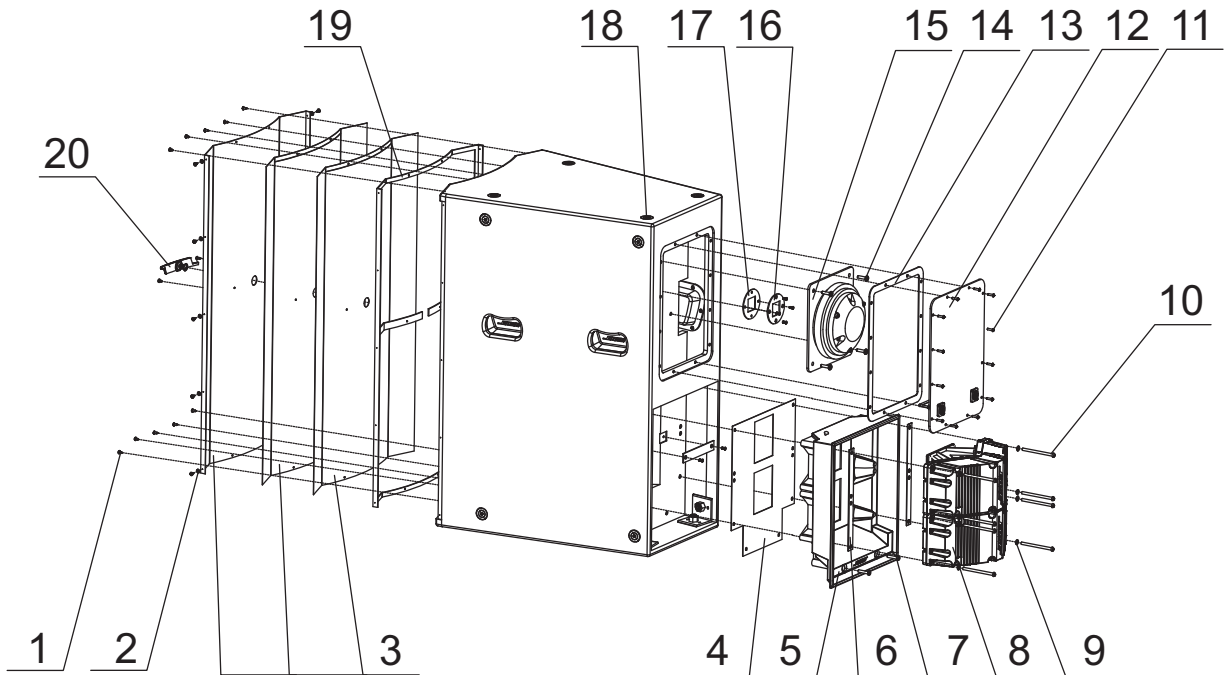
Panaray LT 3202 WR Loudspeaker Exploded View
